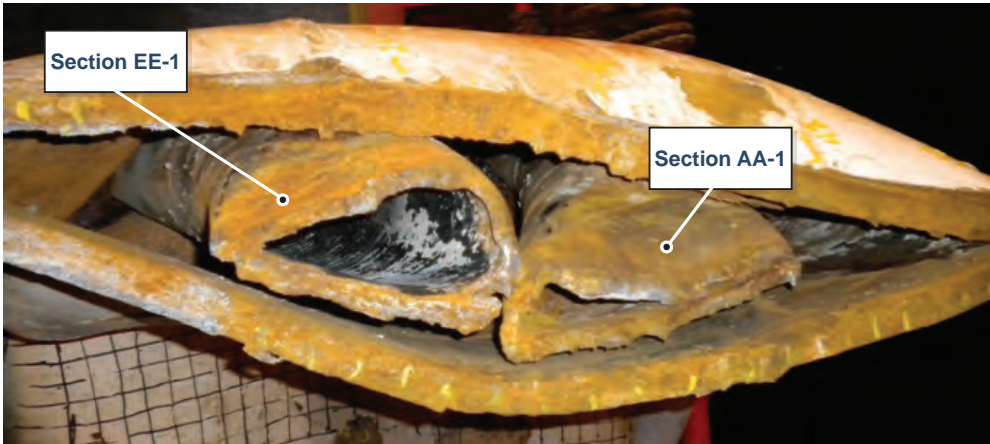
Sheared Section of the Recovered Riser at the Lower Kink End with the Drill Pipe Sections EE-1 and AA-1
